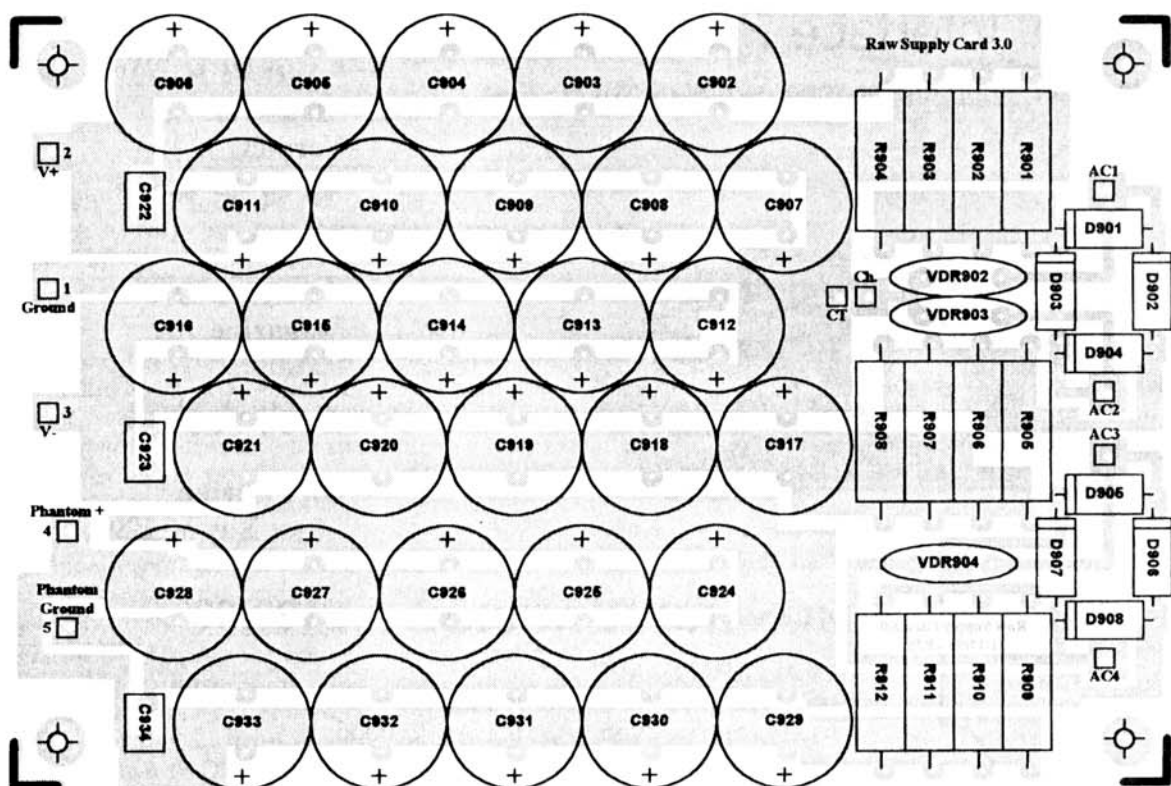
Raw supply card: printed circuit board and parts layout. Like the preregulator card, this can be used to power other projects. For high-current applications, mount D901-908 and R901-912 1/4" above the surface of the board, to allow some air circulation.
